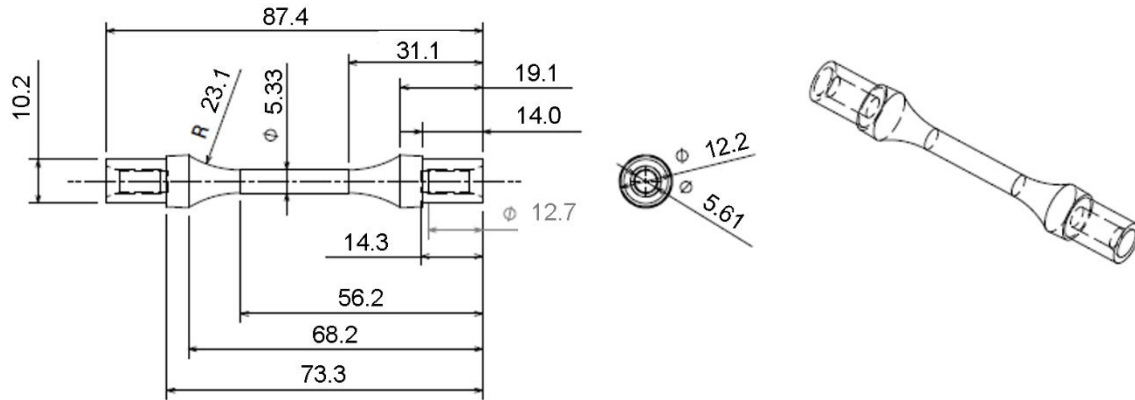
Fatigue test specimens – second design. Dimensions are in millimeters.
